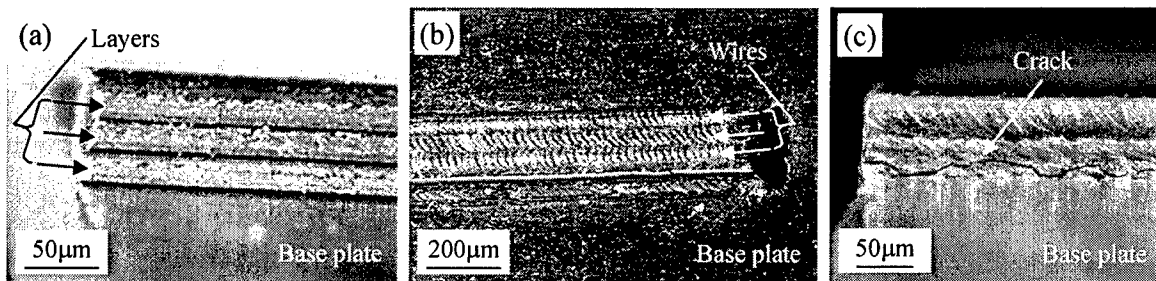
Typical appearance of the flat wire welded samples, illustrating (a) three layers, (b) solidification fronts along the three wires in each layer, and (c) cracking at the base of the Ti-6-4 deposits.
